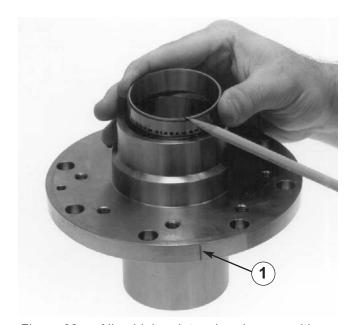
Align high point on bearing cup with pencil mark on housing. (1) Pencil Mark
